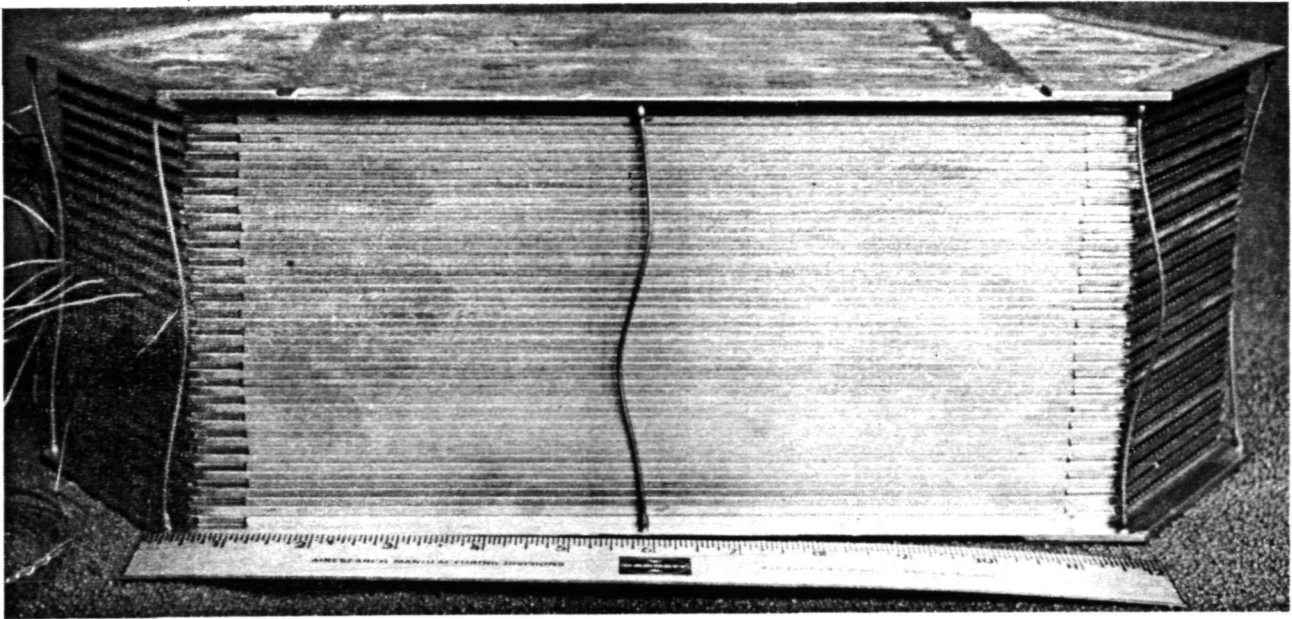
Core Assembly Installed In Carbon Braze Fixture.
